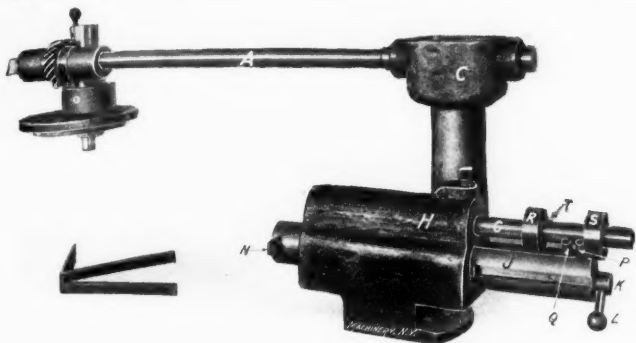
Chasing Attachment for the Flat Turret Lathe.
